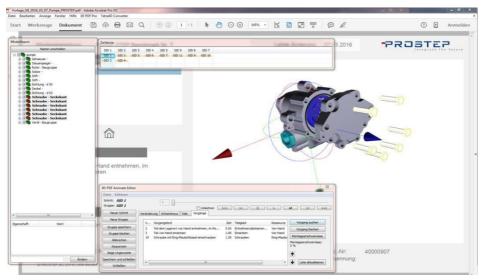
Authoring and assembly planning tool 3D PDF Pro.
